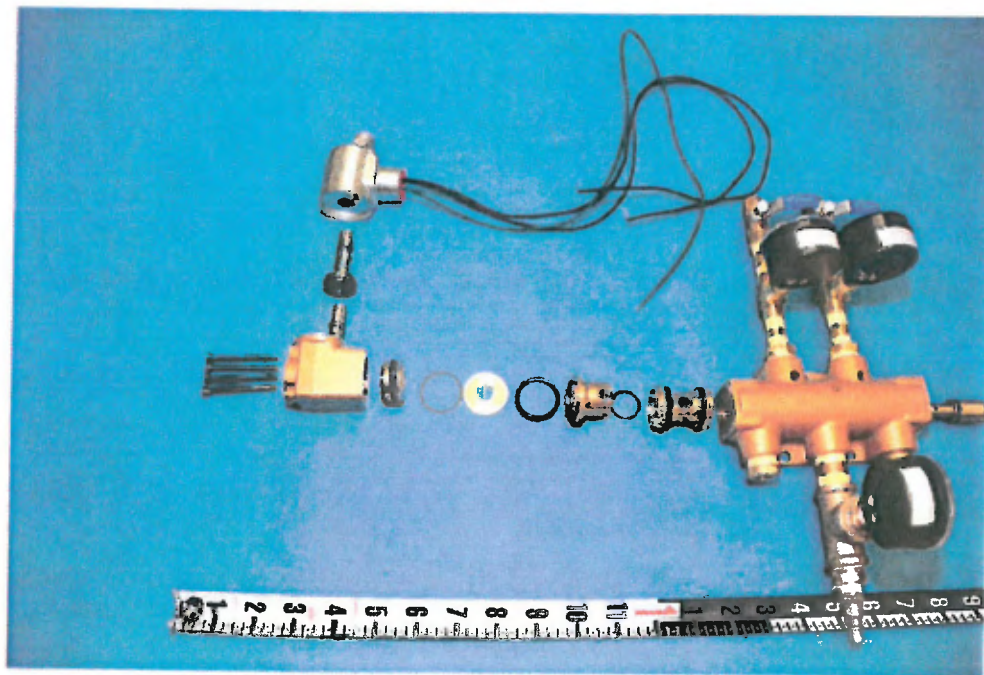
Close View of Exemplar Versa Bottom Dump Valve Components
